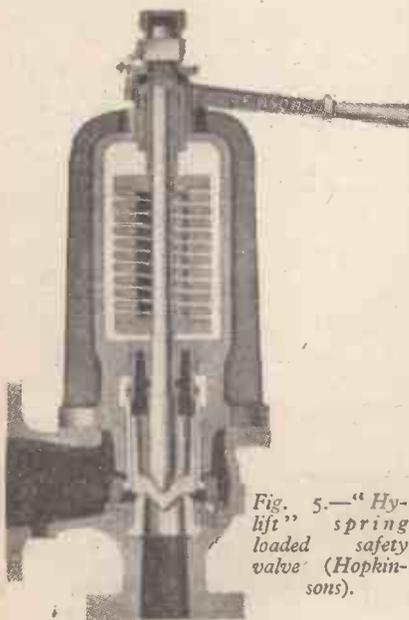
"Hy-lift" spring loaded safety valve (Hopkinsons).
